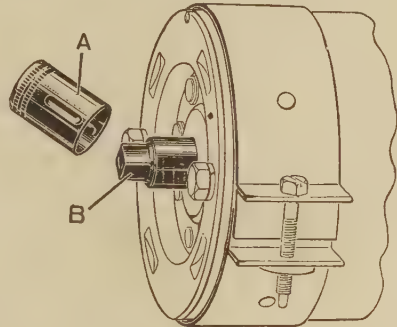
Squared End of Lucas Starting-motor Shaft with Cover removed.
